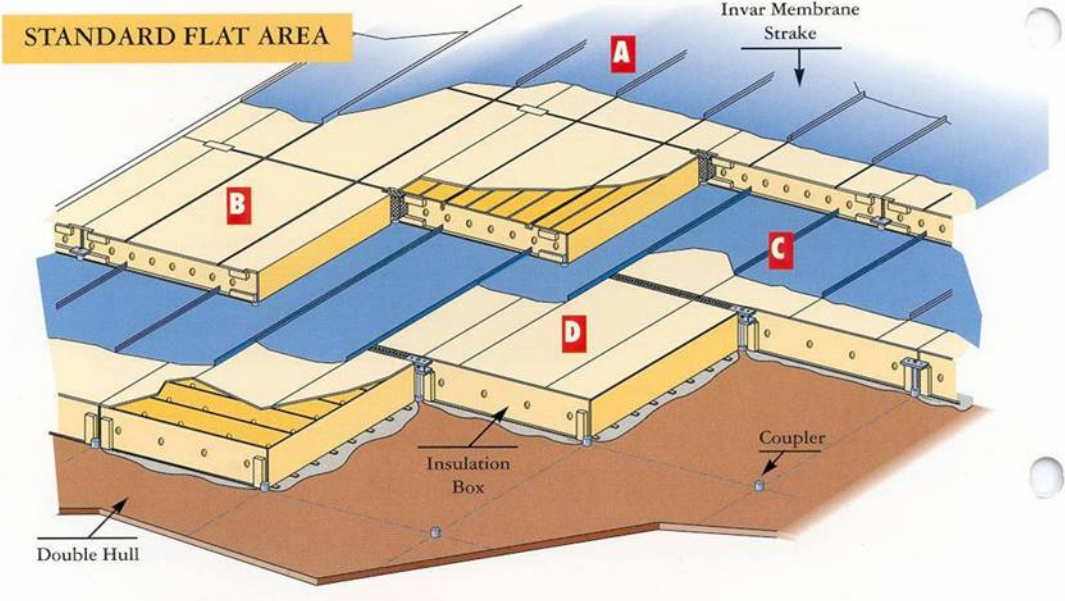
GTT NO96 Construction - Courtesy GTT
